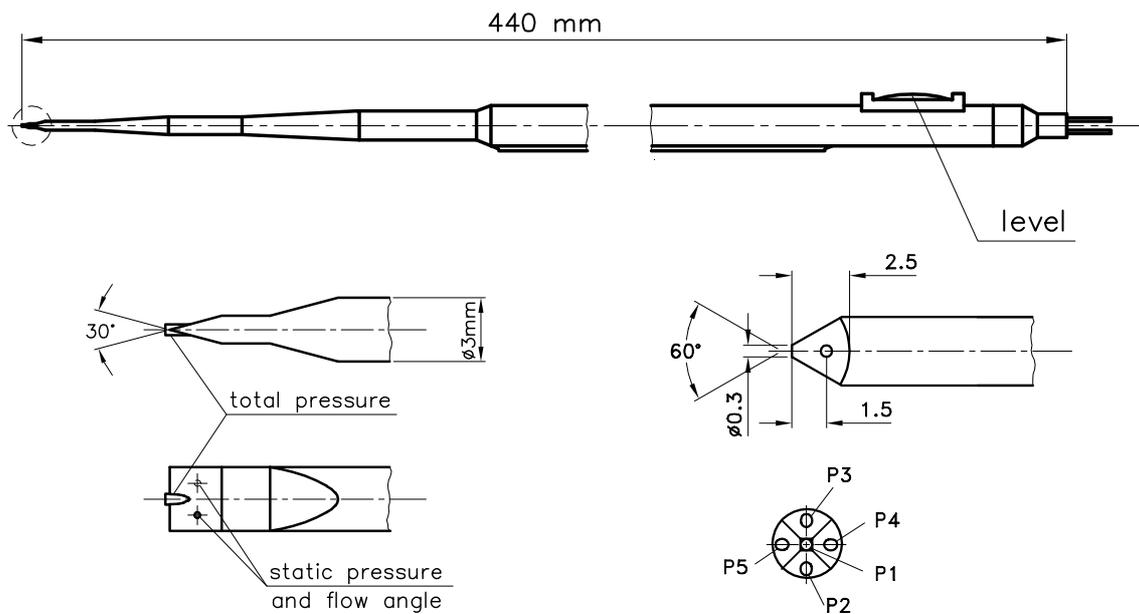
Wedge Probe head on the left; probe shaft on top; Pyramid Probe head on the right;
